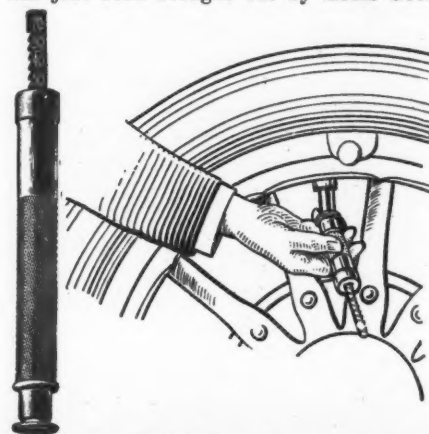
New Twitchell pencil gauge which may be held at any angle
